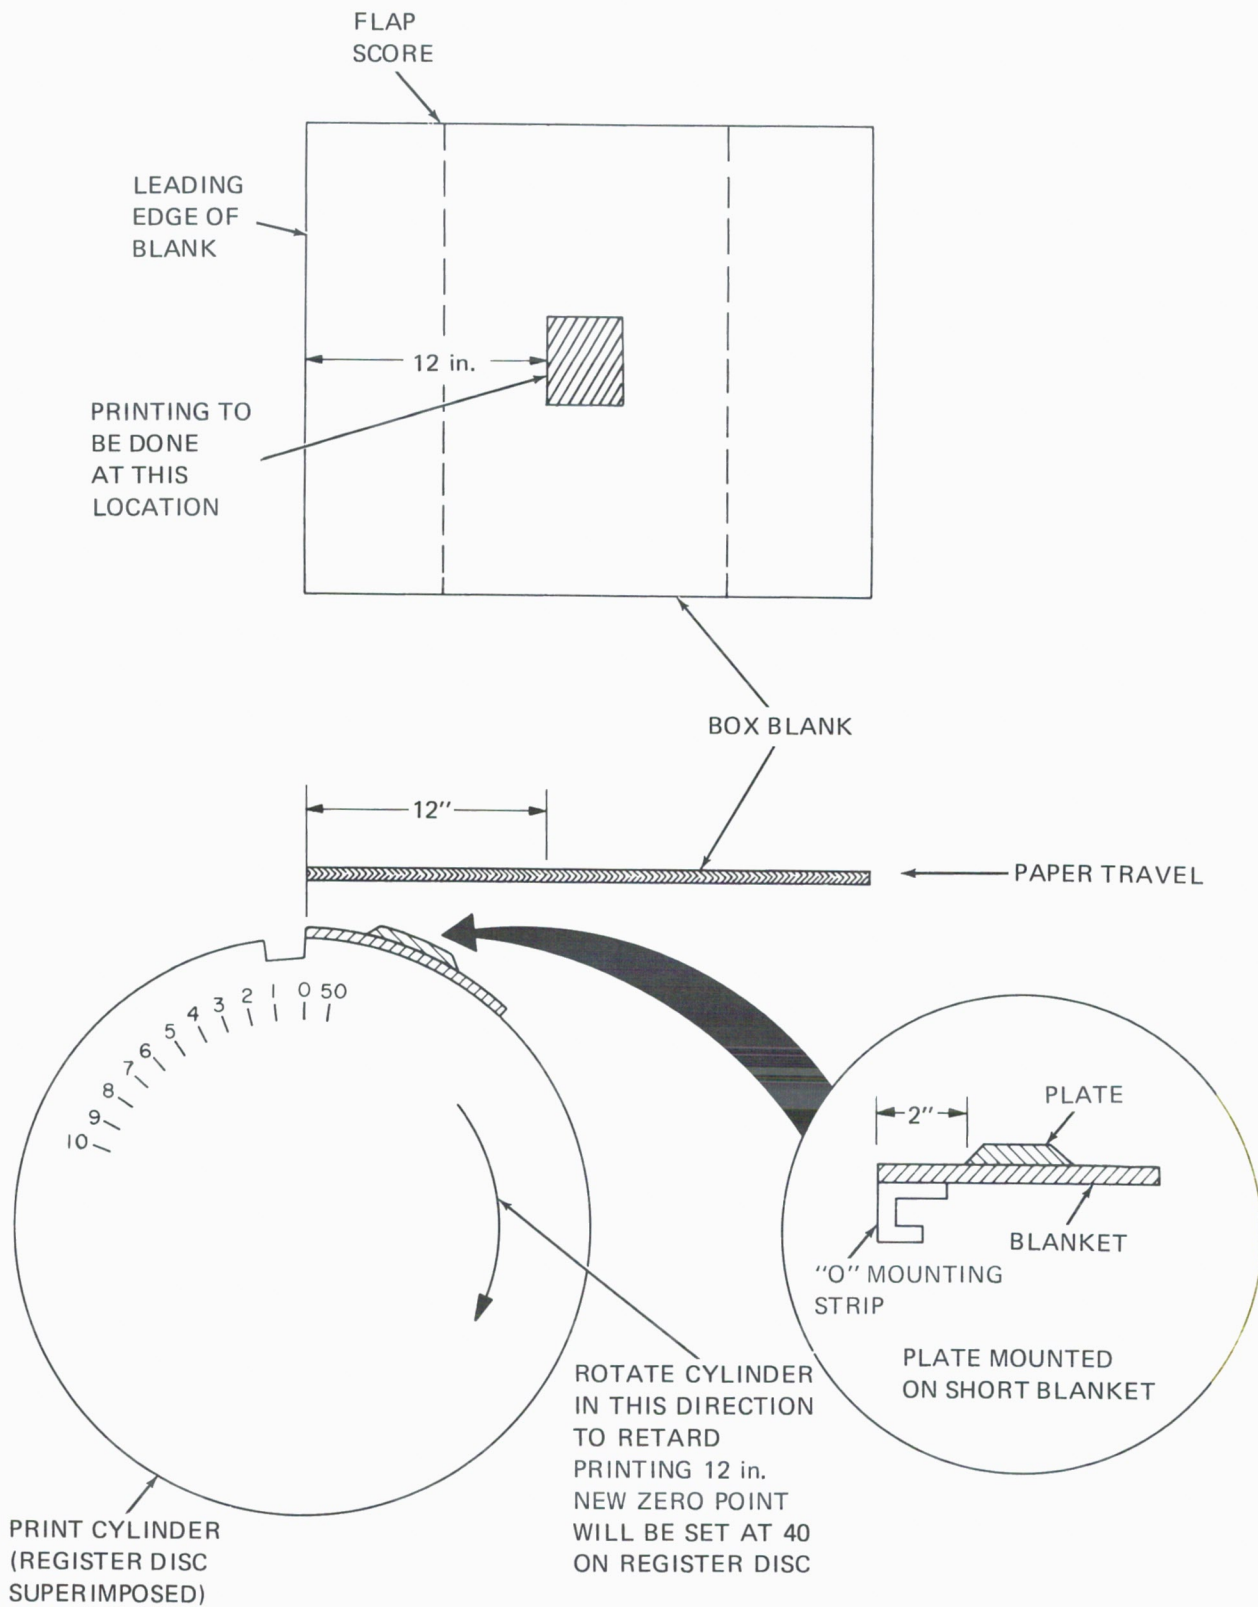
MOUNTING SHORT PRINTING BLANKET
